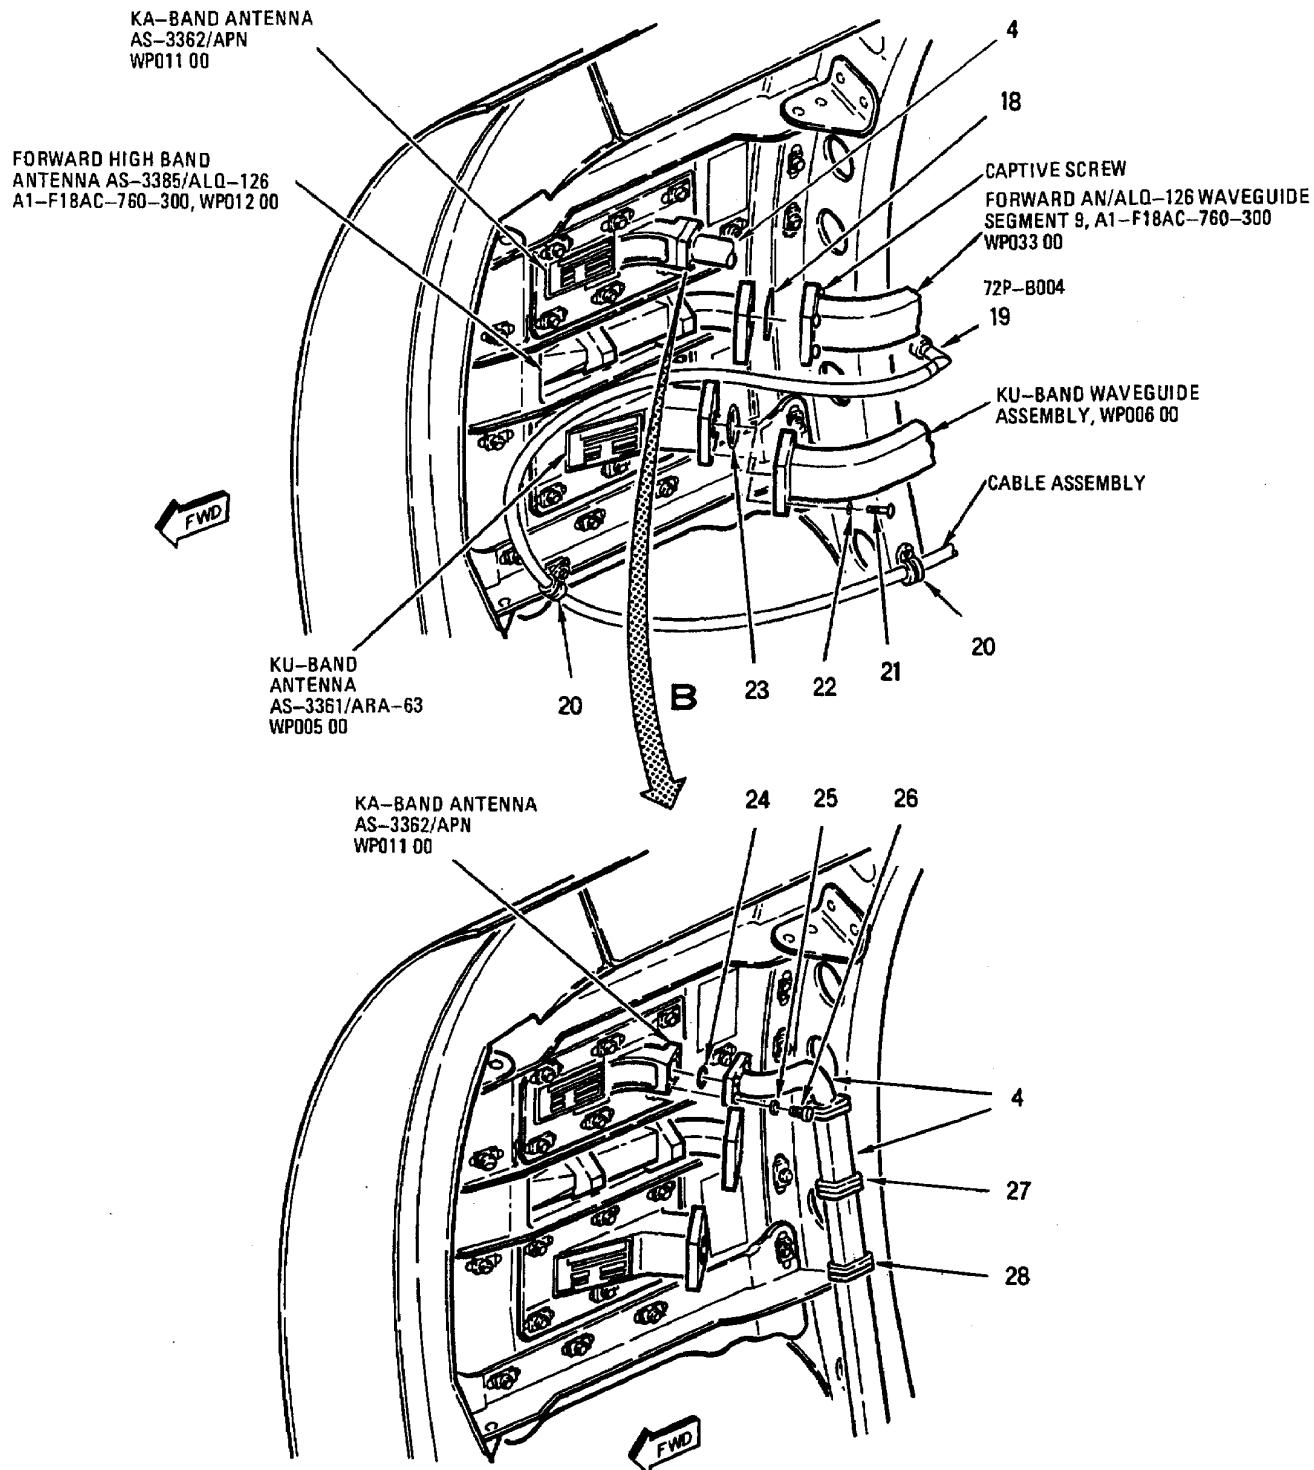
KA-Band Coax Cable/Waveguide Assembly (72W-B501 and 72W-B502) - 161702 AND UP (Sheet 3)
